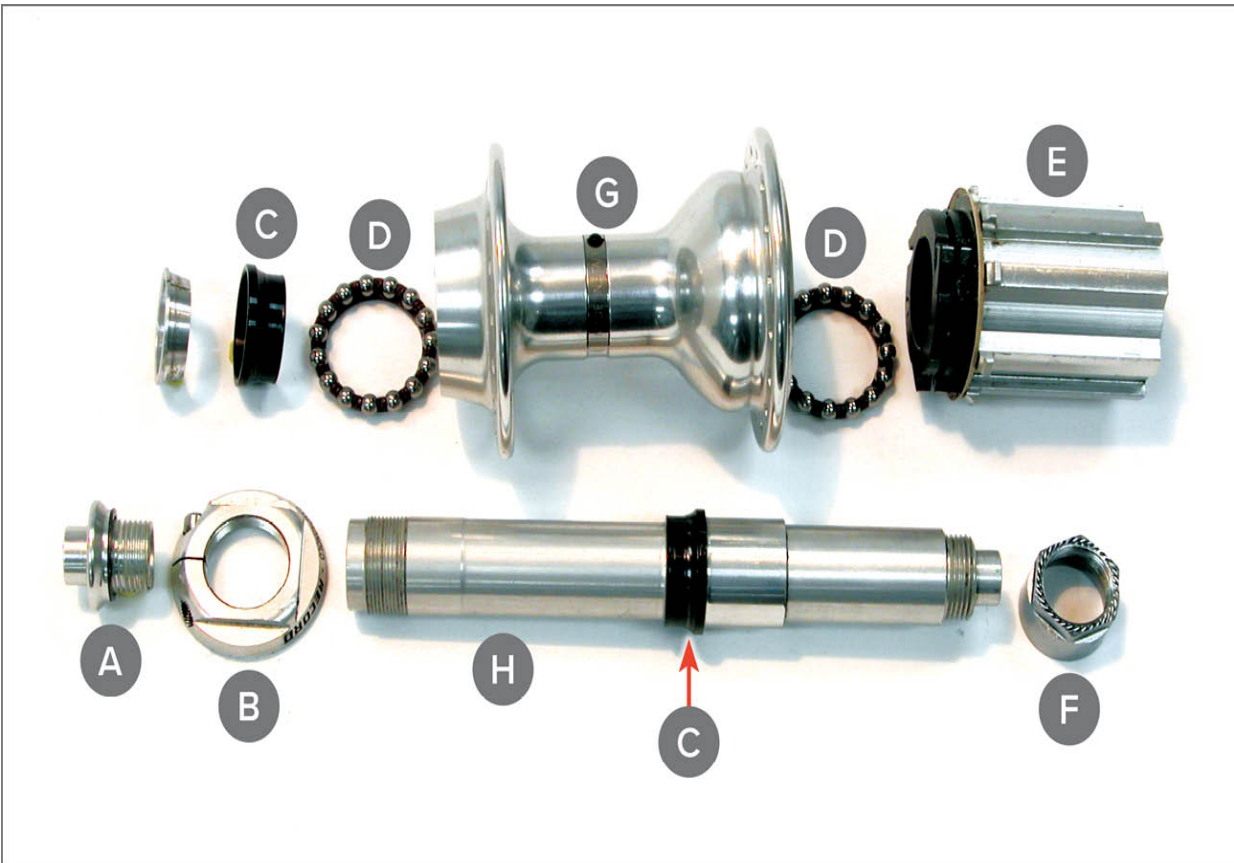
Component parts of the Campagnolo® Record hub: (A) axle end cap, (B) left-side lockring, (C) cones, (D) ball bearings, (E) freehub, (F) right-side axle nut, (G) hub shell, (H) axle
